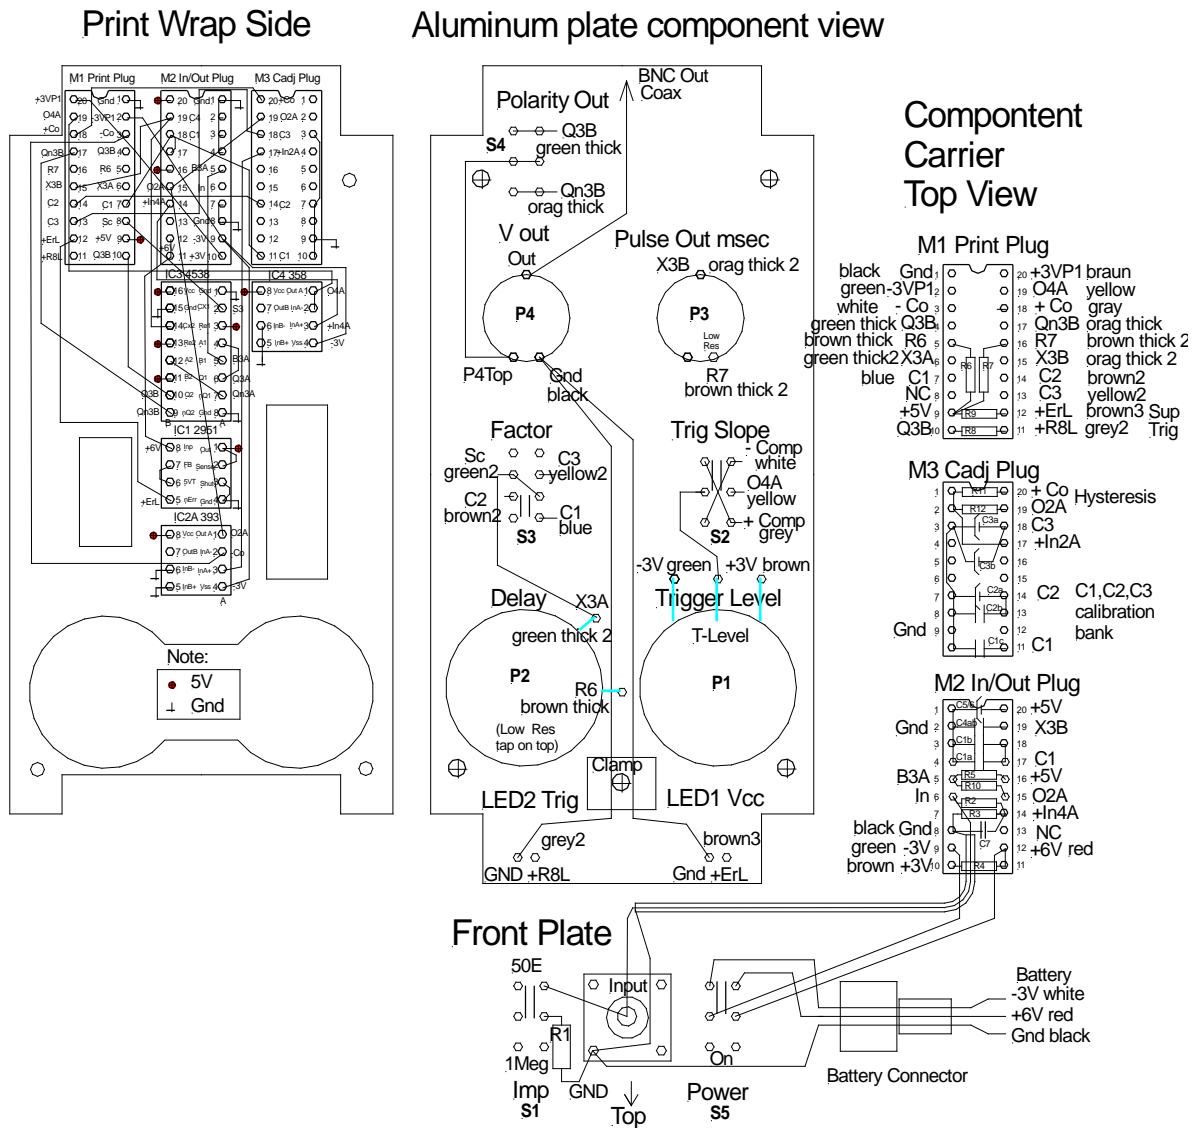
Wire Wrap Print , components on aluminum plate and components on carrier plugs
